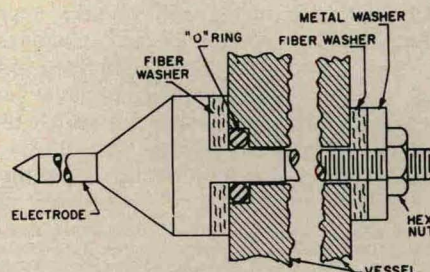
ELECTRODE ASSEMBLY, O-RING TYPE.
